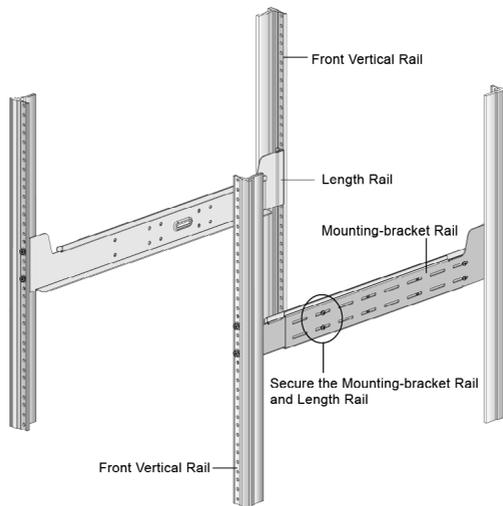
Attaching the Mounting Rails to the Cabinet
